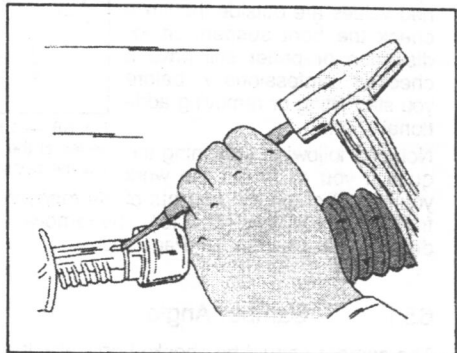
The track rod ball joint housing is secured as shown.
